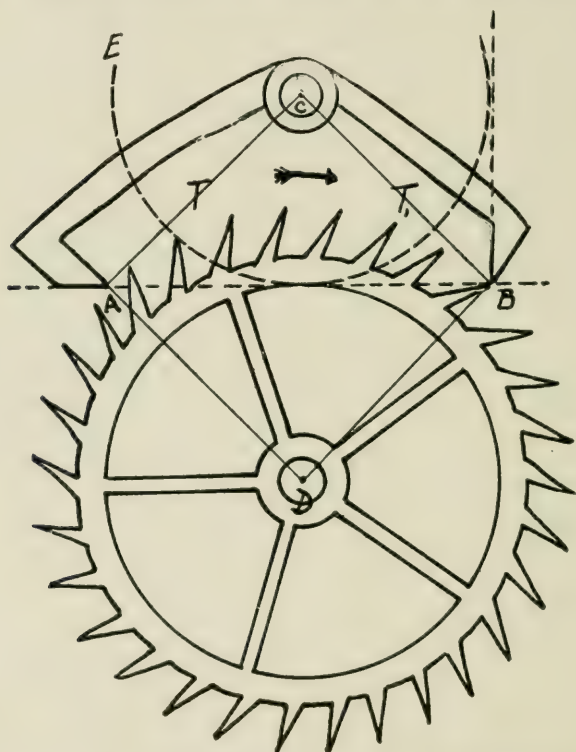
LAYING OUT A RECOIL ANCHOR ESCAPEMENT.
